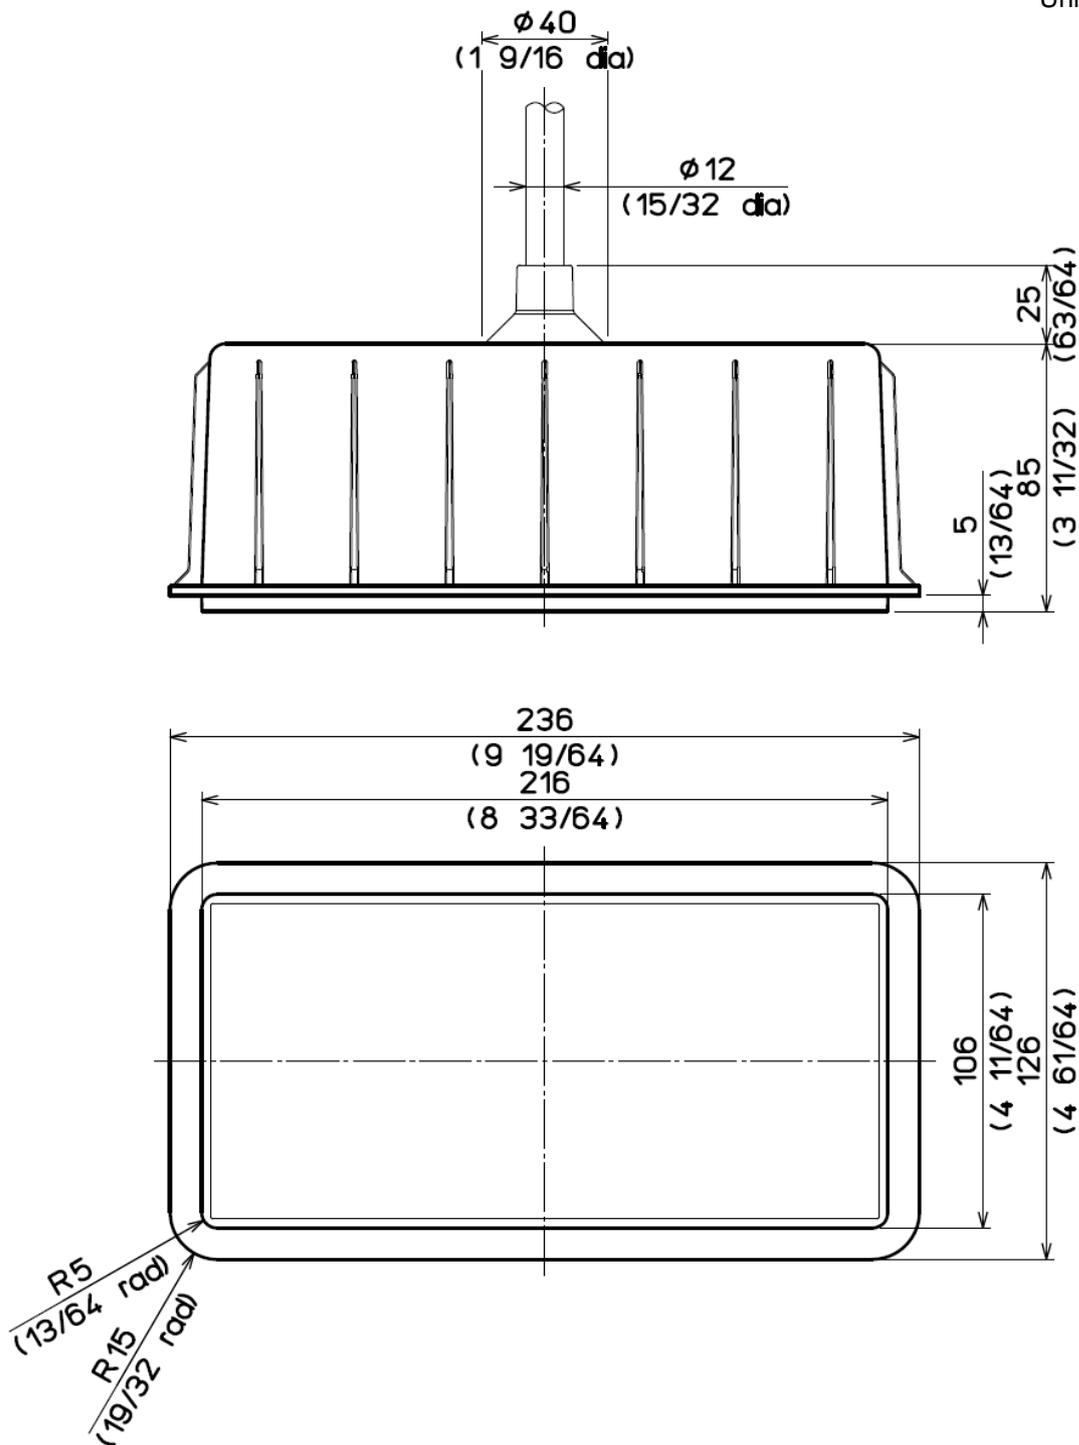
Outline dimensions of a transducer (TD360-K)
